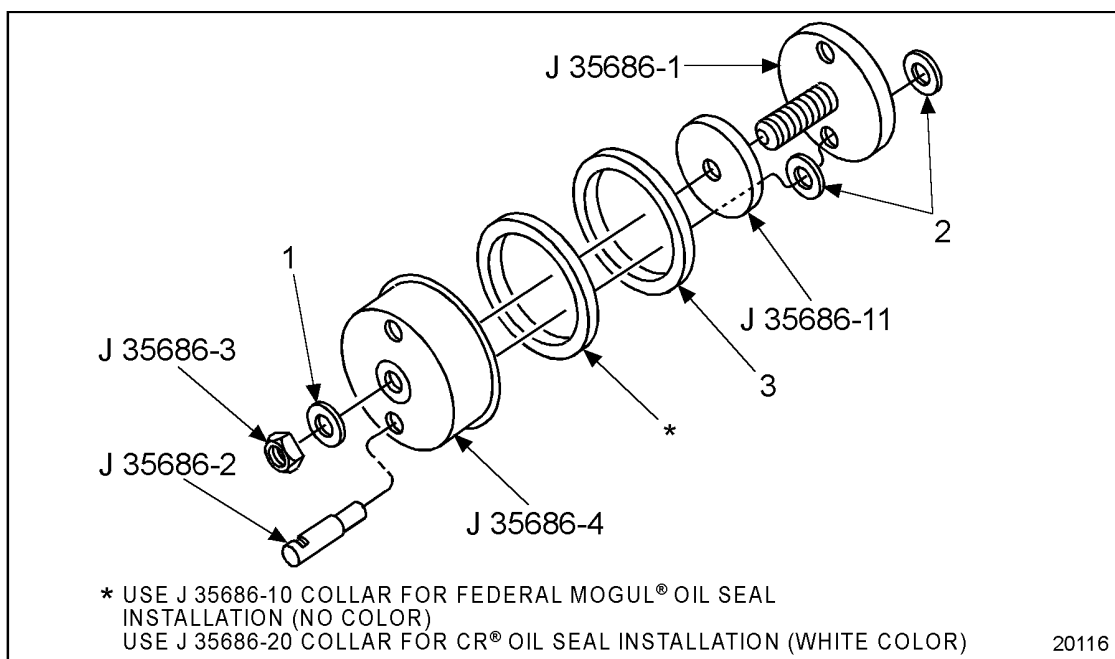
Rear Oil Seal Wear Sleeve Removal
